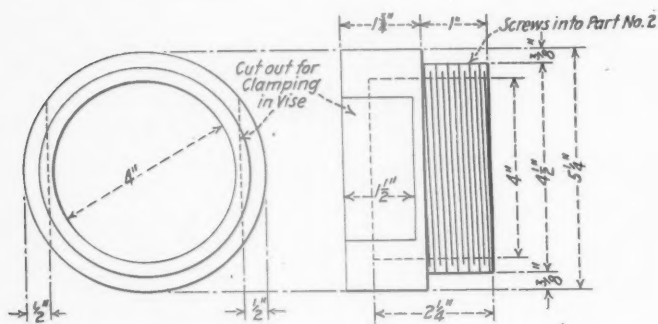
Sketch Showing the Holder As It Is Clamped in the Vise
